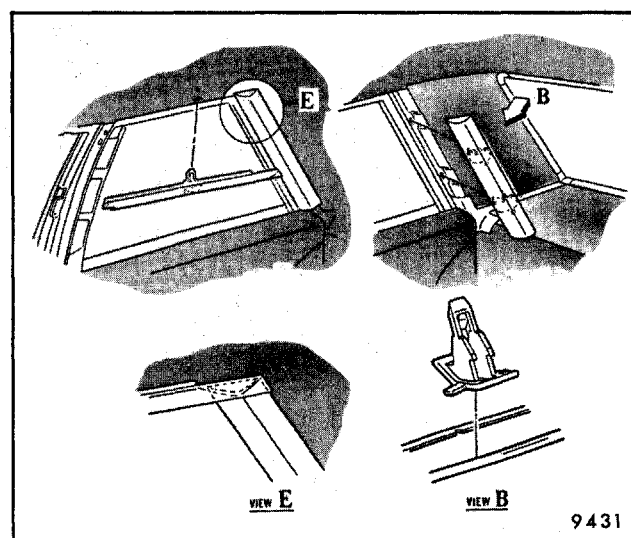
Rear Quarter Window Garnish Molding - "B,C" Styles Typical
